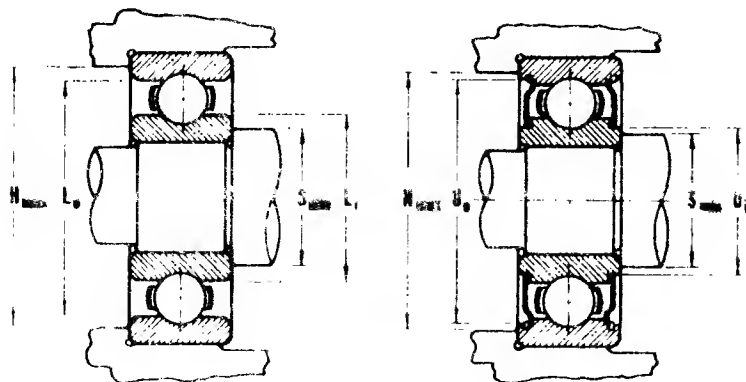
Shaft and housing diameters for open bearings (left) and shielded or sealed bearings (right).
